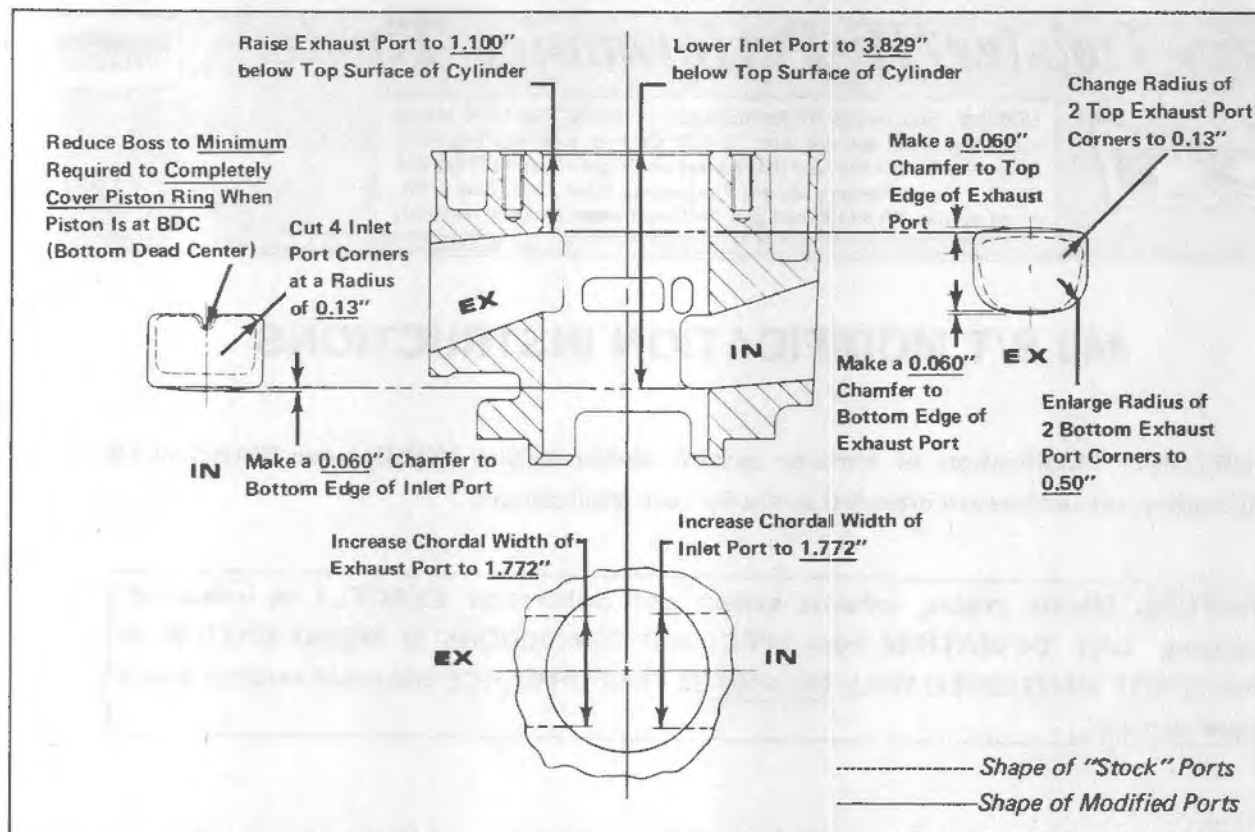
440 S/T "Modified-Stock" Cylinder Dimensions
